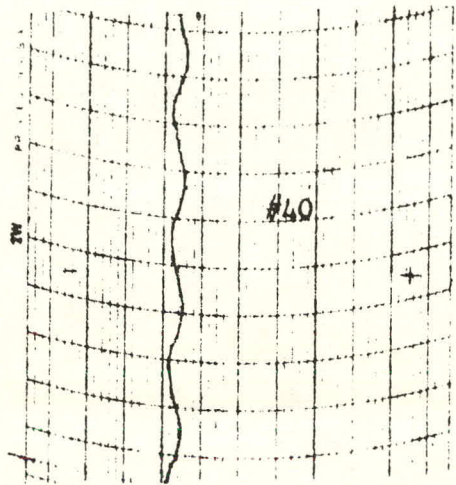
Composite Readings Obtained at BKC on Fellows No. 4 Redliner Gear Checker
